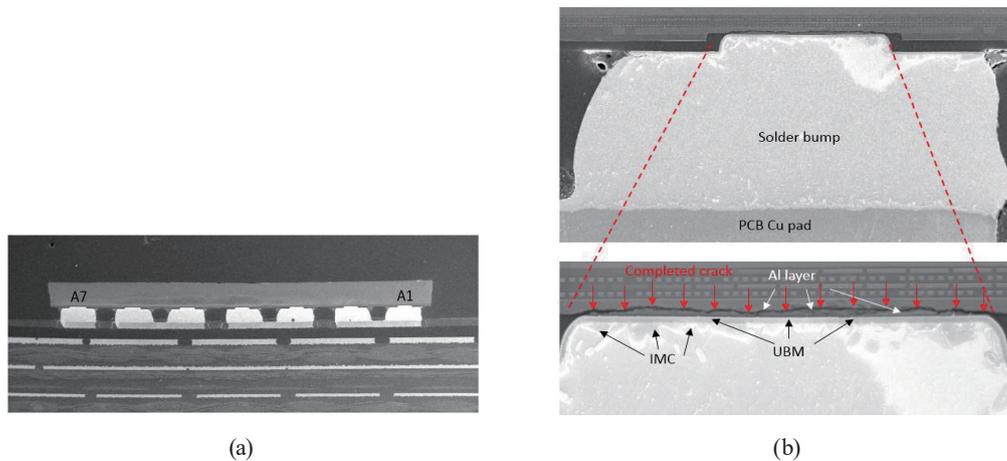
(Color online) Lot 1, SAC405. SEM inspection after cross section: (a) the side view of the package, and (b) the completed crack in the aluminum layer of the A1 ball, where the cracked area is shown using red arrows.
